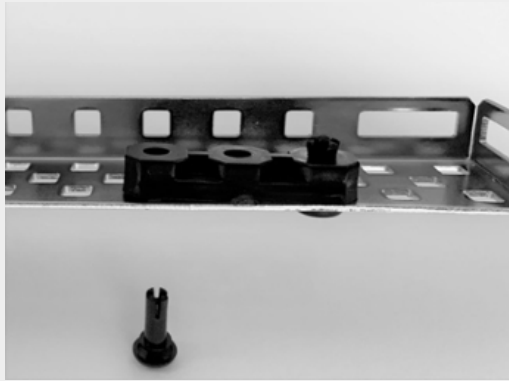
Attaching a Bearing Flat with Pop Rivets on a Steel Chassis Rail 2 x 1 x with Tabs
